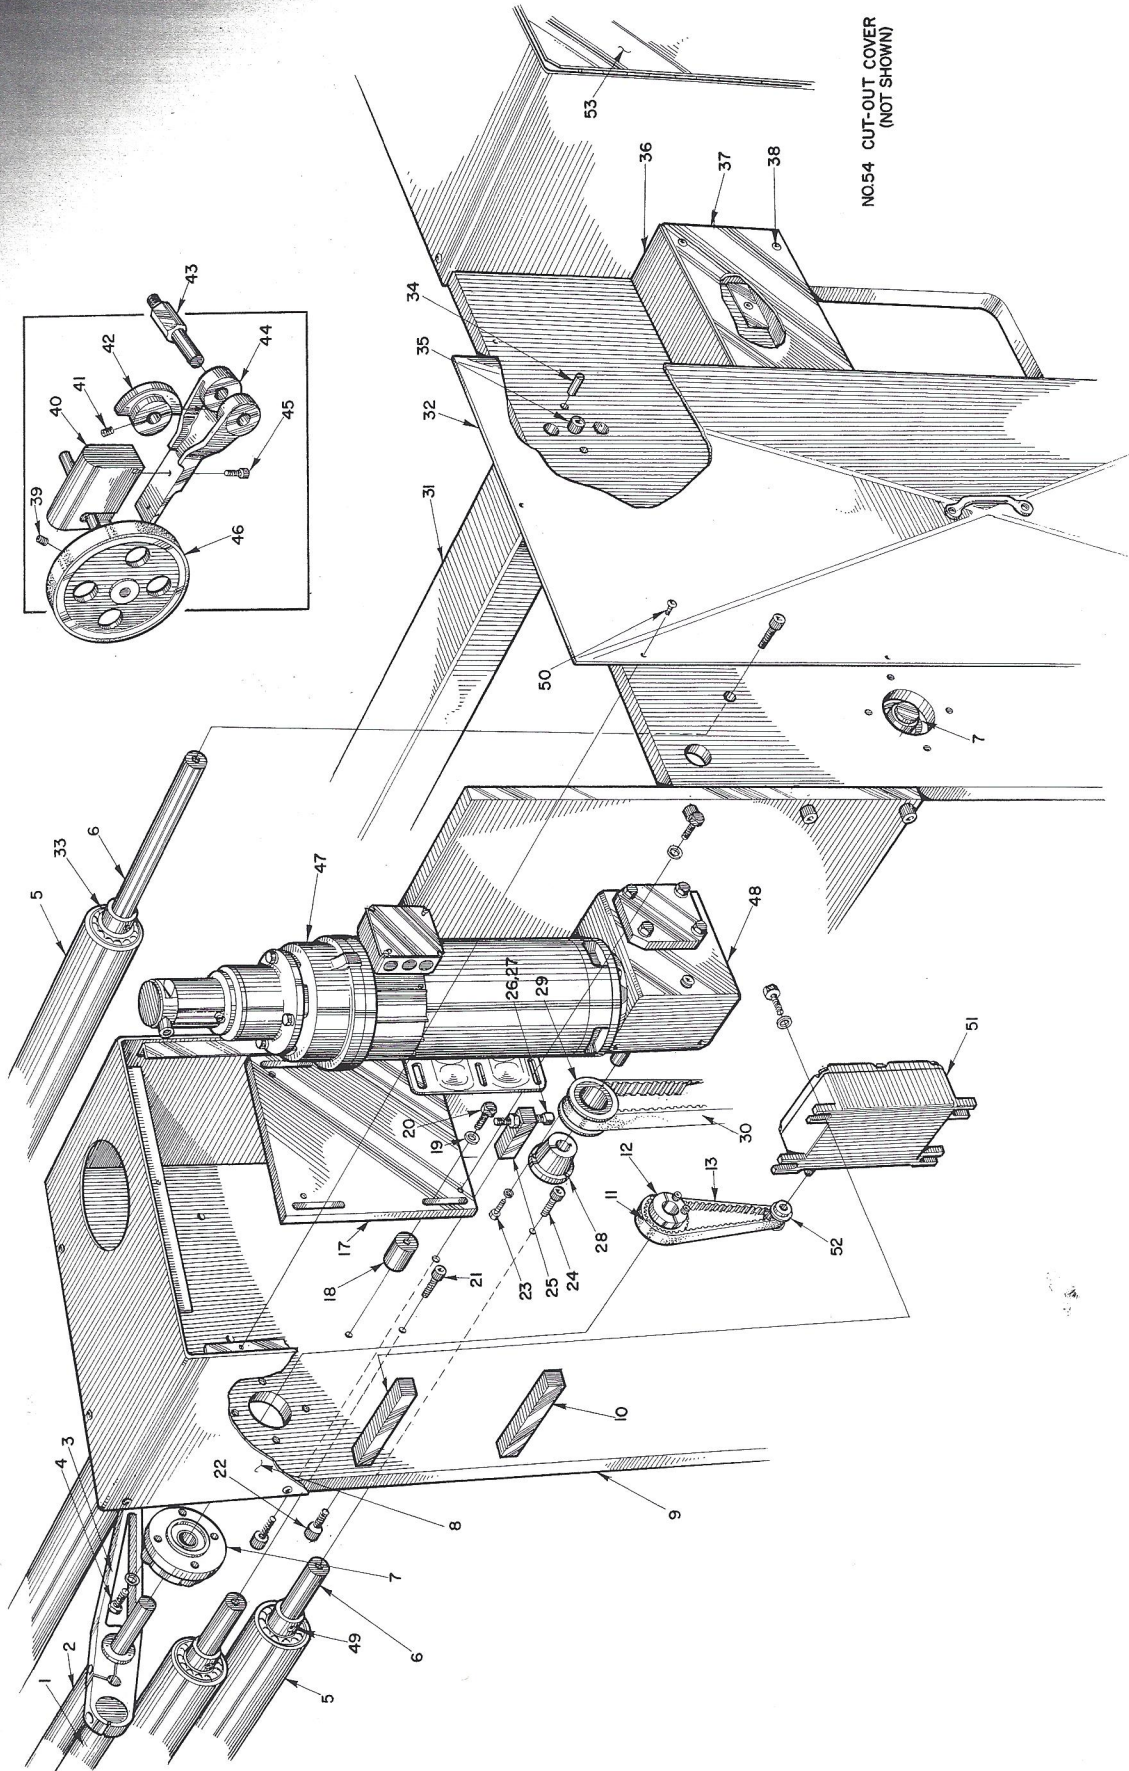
R.H. NIP ROLL ASSEMBLY
